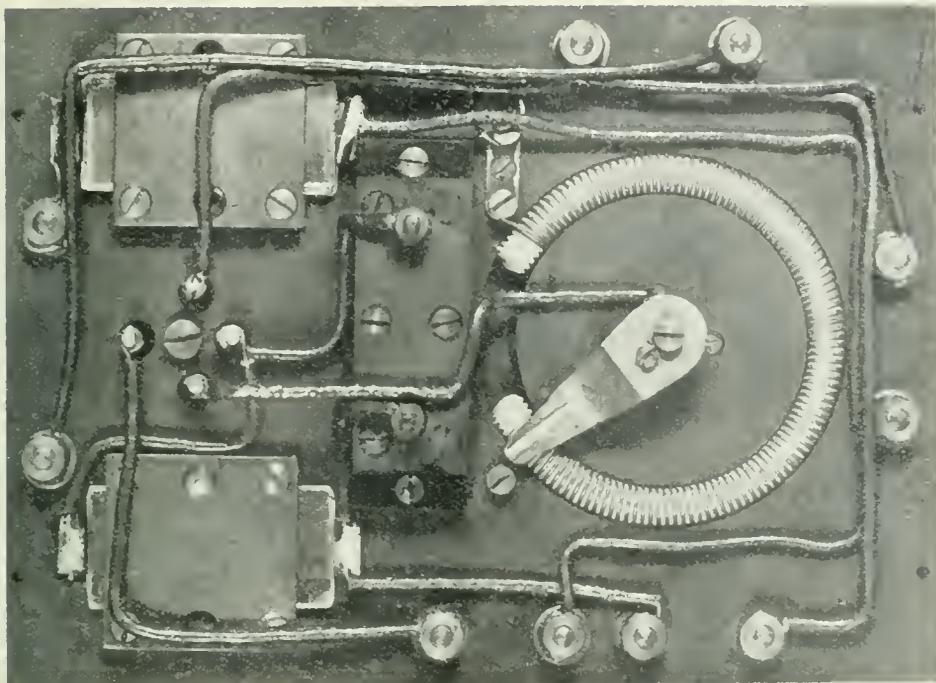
Other types of component parts are made use of here. It is a simple matter to adapt the lay-out to suit the parts available.
